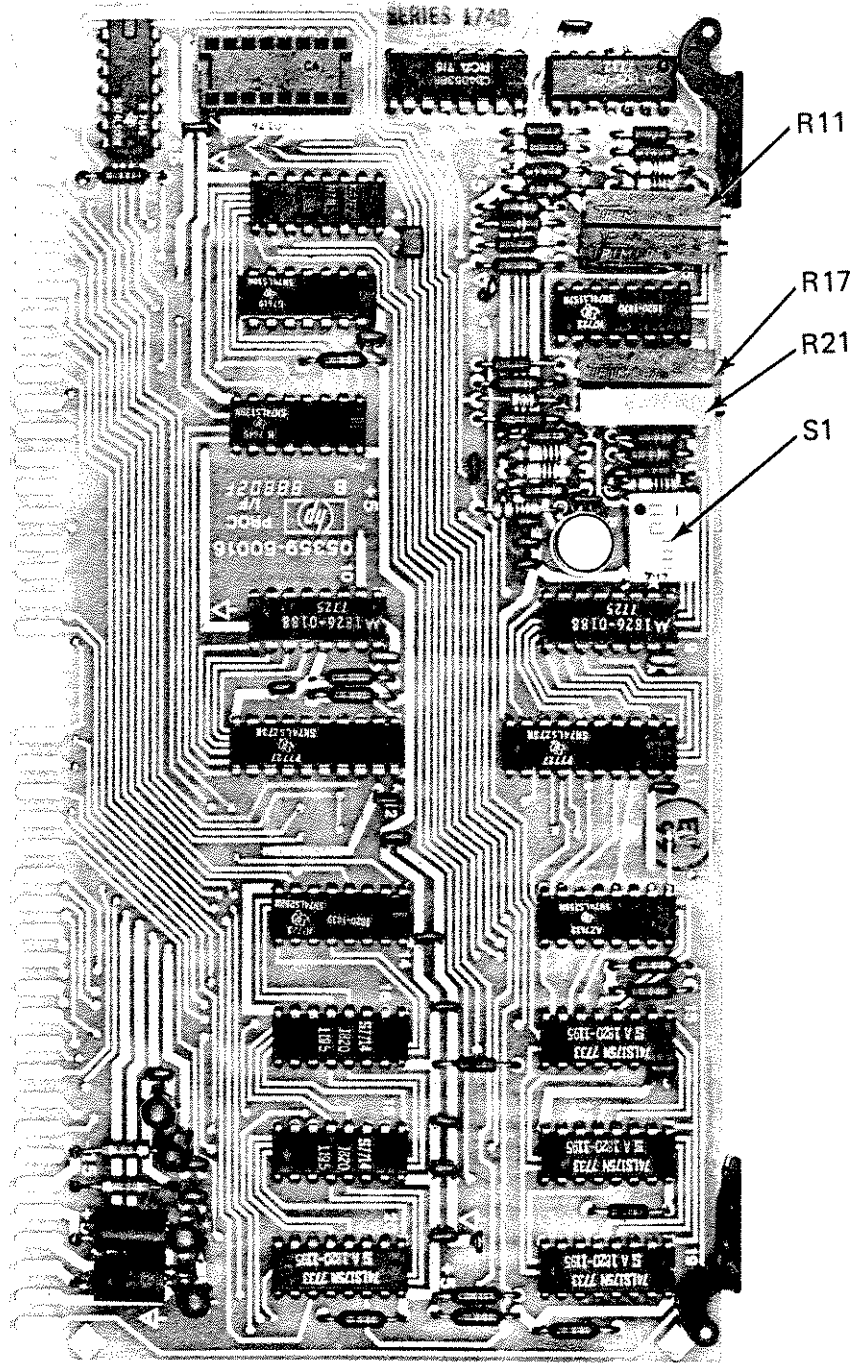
A16 Processor Interface Assembly Adjustments (Continued)
